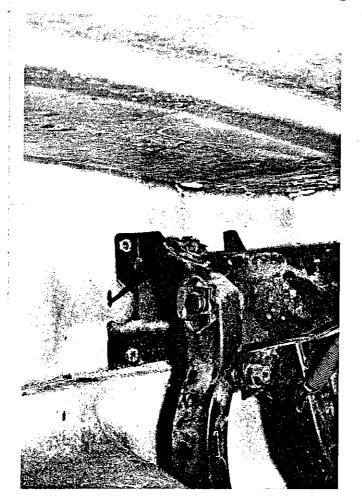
& 31 The cable and bracket in position and connected to the clutch pedal. Fig 30 was taken before the bodyshell was fitted to the chassis and is for demonstration purposes only.
